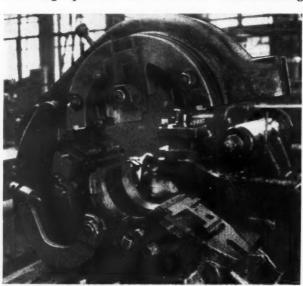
This driver makes it possible to machine journals on car axles without removing the wheel from the axles.
